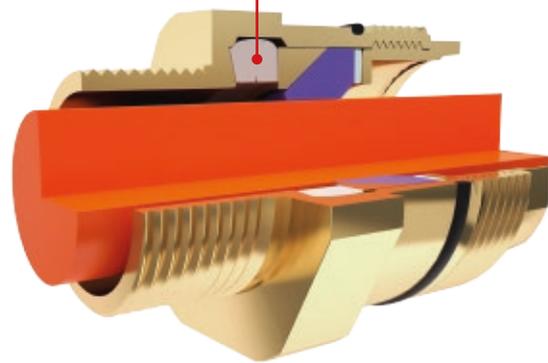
When a larger diameter cable is installed the inner compensator operates to a greater extent.
